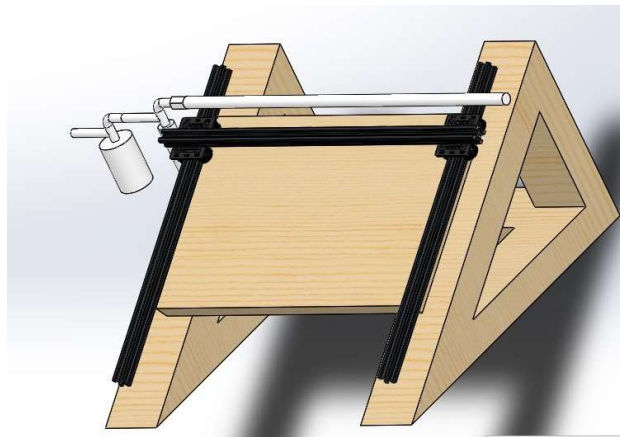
Initial design of wiper rail system mounted on a wooden board test stand.
